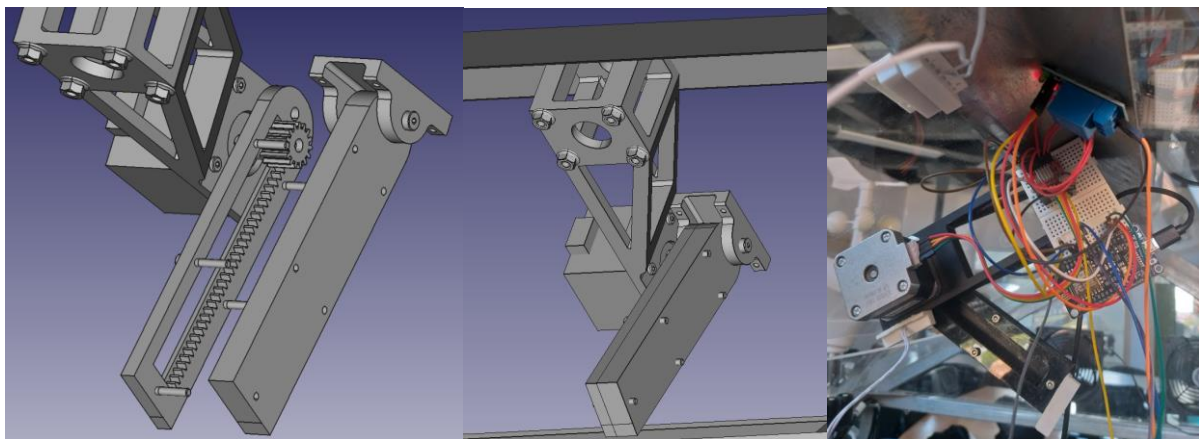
Window opening mechanism 3D CAD exploded view, assembly and implementation.
